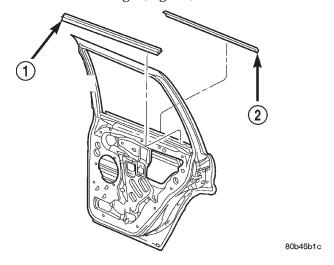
Rear Door Inner/Outer Belt Weatherstrip
